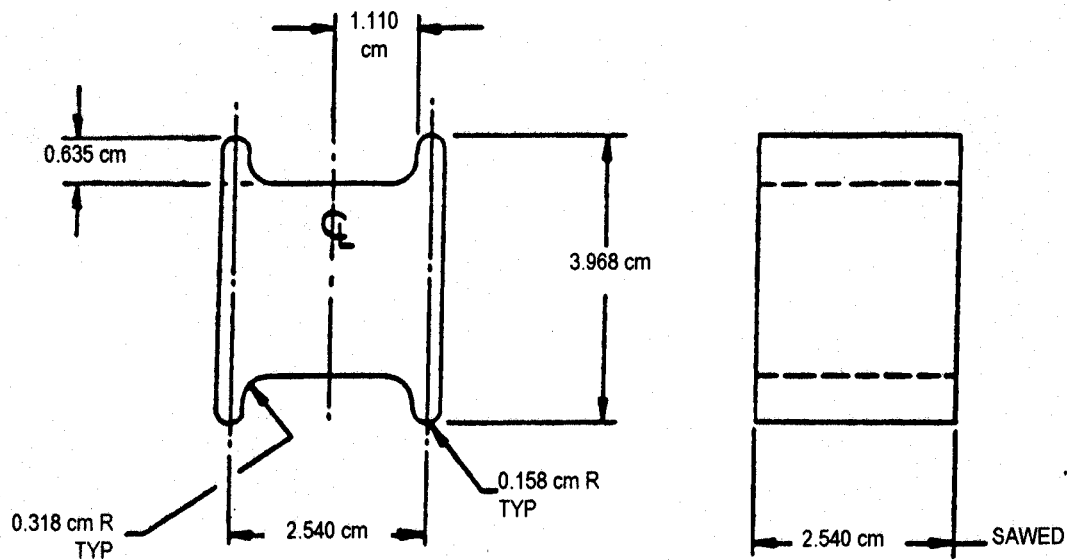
Fixture for Bent Beam Stress Corrosion Assembly
